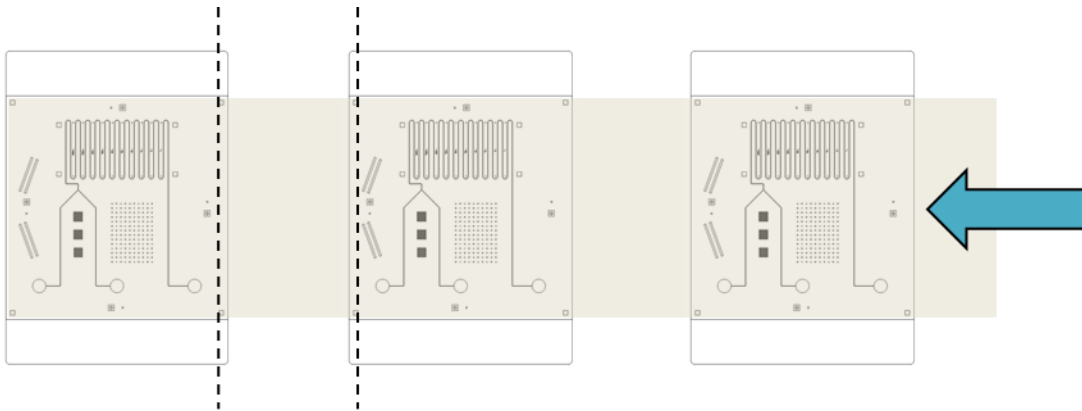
Path of the cutting blades over the taped chips. The chips feed in from the right in this diagram. The chip on the left is fully separated after the cut and can be removed for testing.
